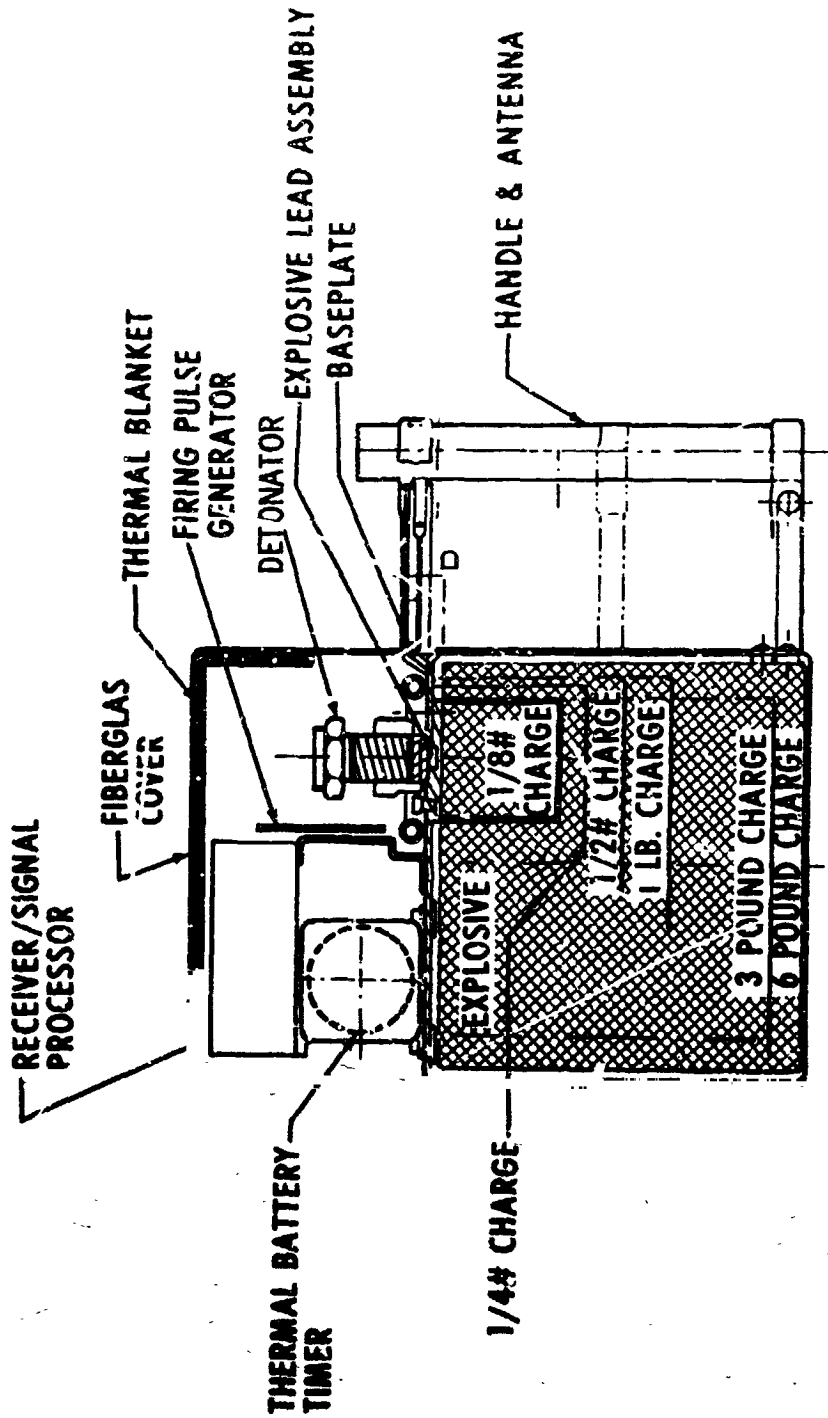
EXPLOSIVE PACKAGE ASSEMBLY CROSS-SECTION (AS PER BEND IX AEROSPACE)
